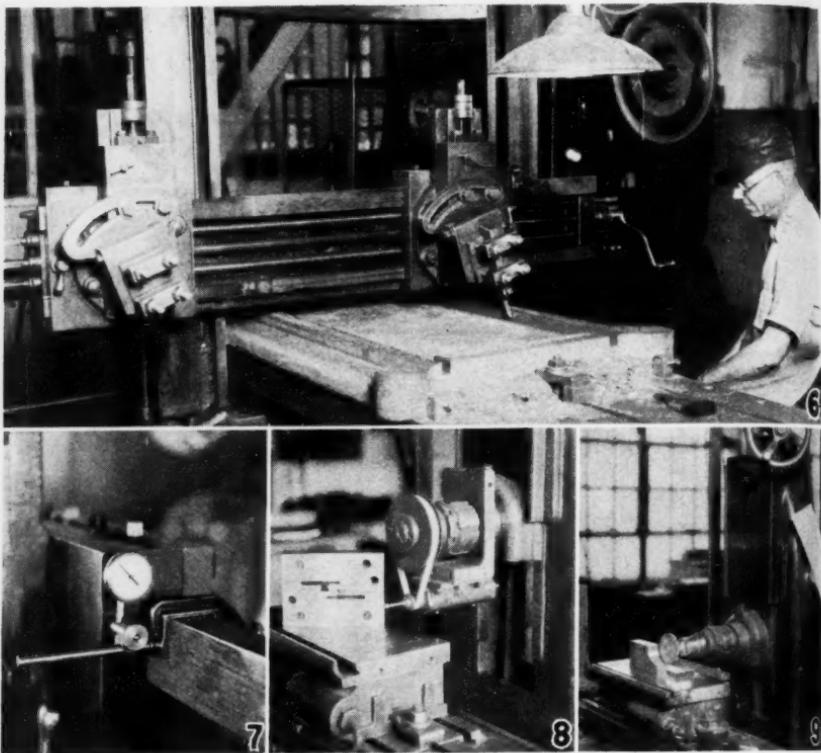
Planing the shoe for the "Frigidaire" panel die. Fig. 7—A dial indicator clamped to the planer rail aids in setting the tool. Fig. 8—An internal attachment, operated from a wood pulley on the machine spindle, converts this surface grinder into an internal grinder. Fig. 9—All radii are ground, saving time and producing better work.
